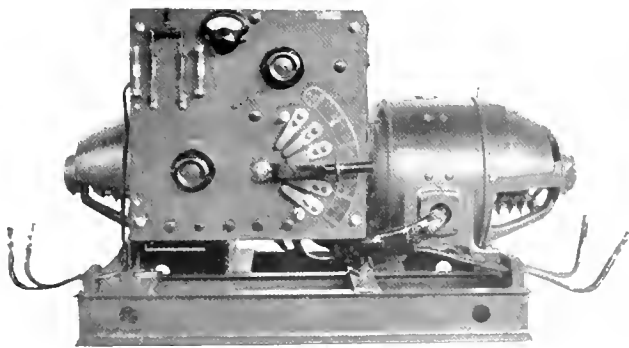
200-ampere Arc Welding Generating Set with Control Panel (Front View)
